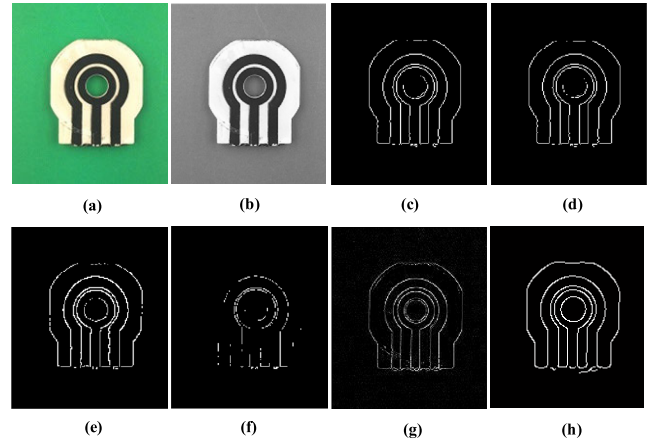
Segmented pixel edges using different operators. (a) The original image, (b) After rgb2gray color space transformation, (c) Sobel operator, (d) Prewitt operator, (e) Roberts operator, (f) Marr-Hildreth operator, (g) Laplace operator, and (h) Canny operator.
